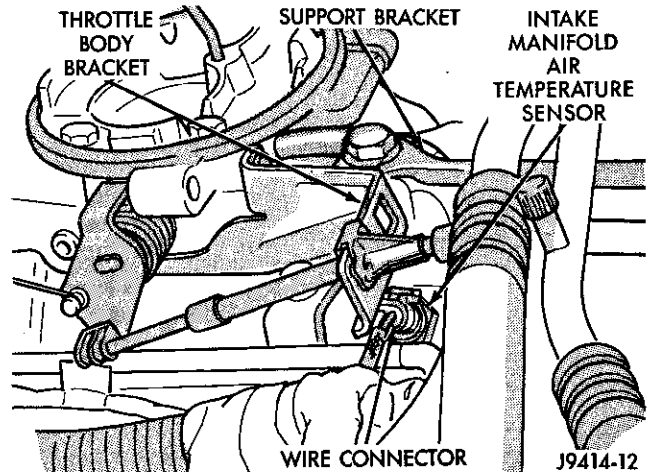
Support Bracket—Generator Mounting Bracket-to-Intake Manifold—Typical
